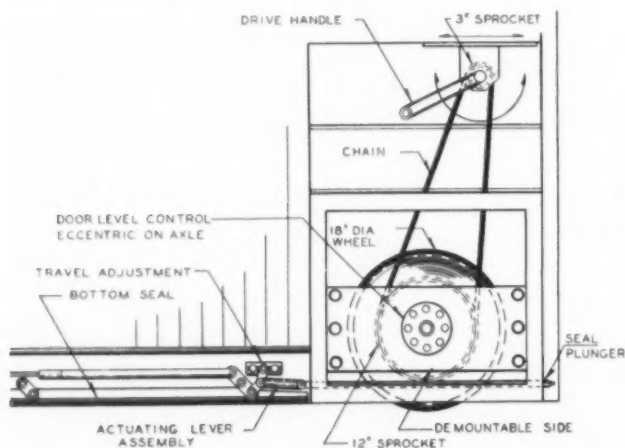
Equipment door chain-drive and bottom-seal mechanism.
